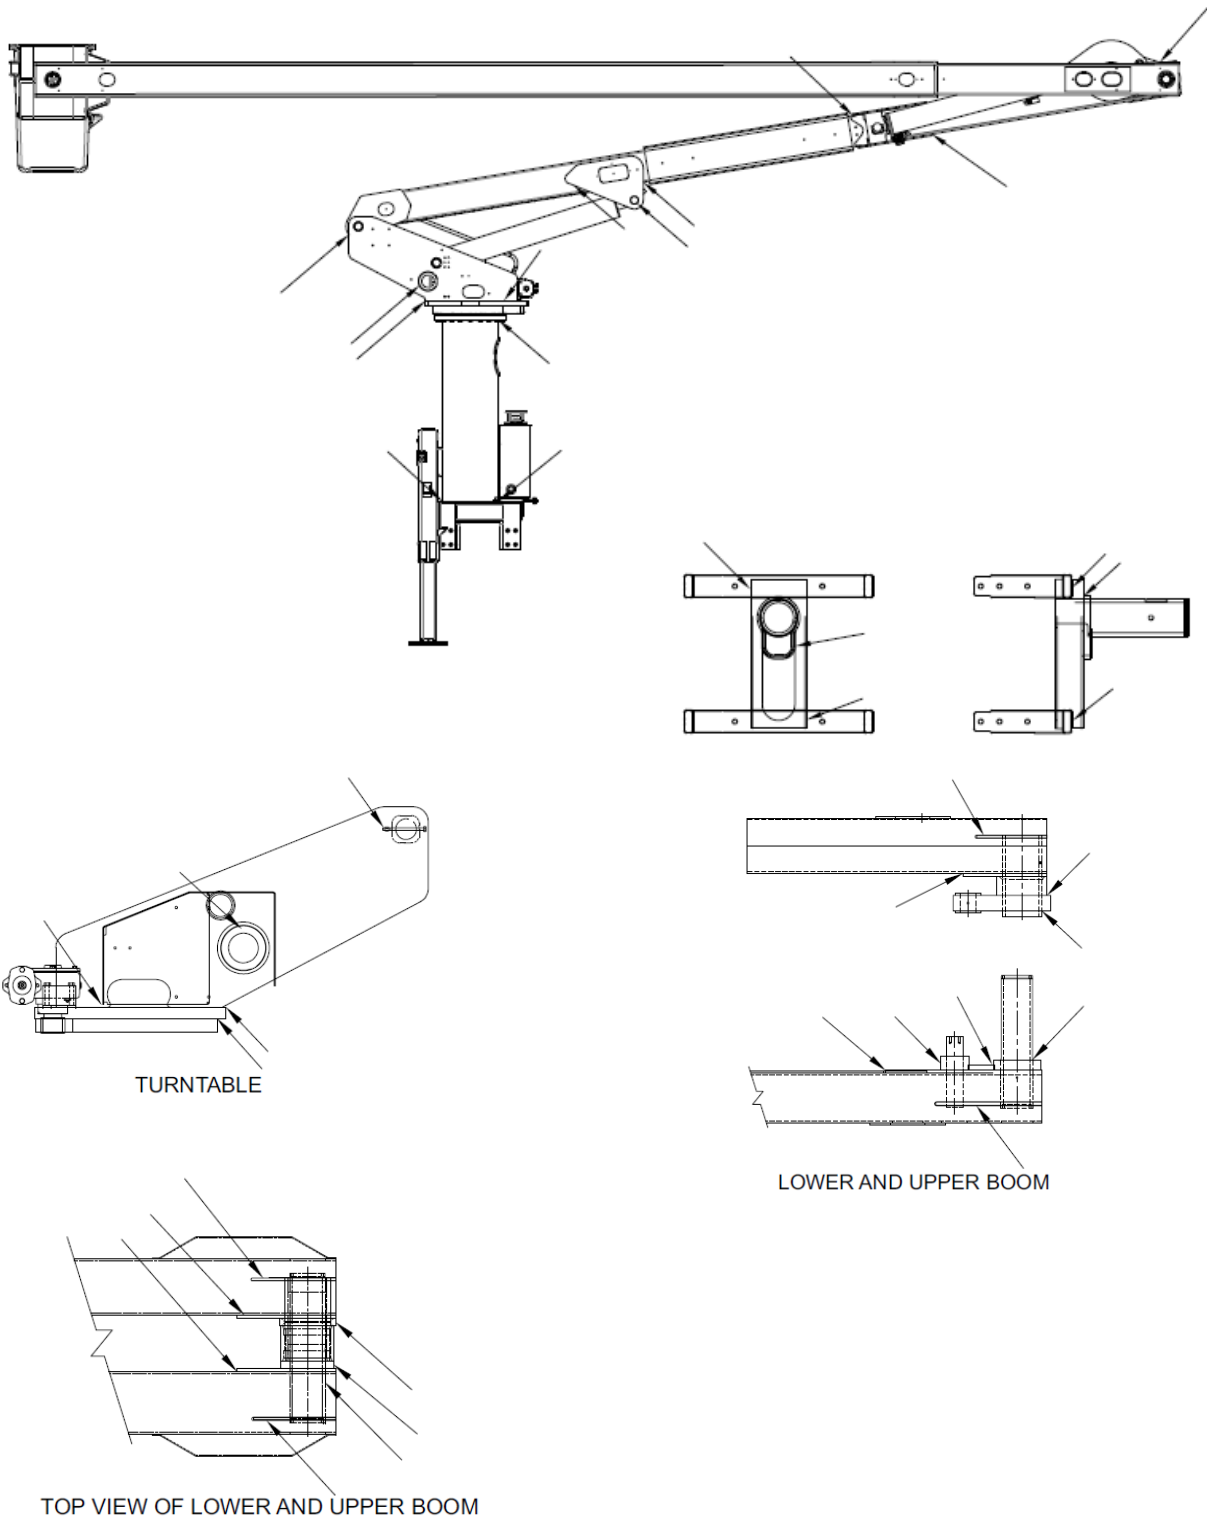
Example XT Pro Aerial Device Critical Weld
